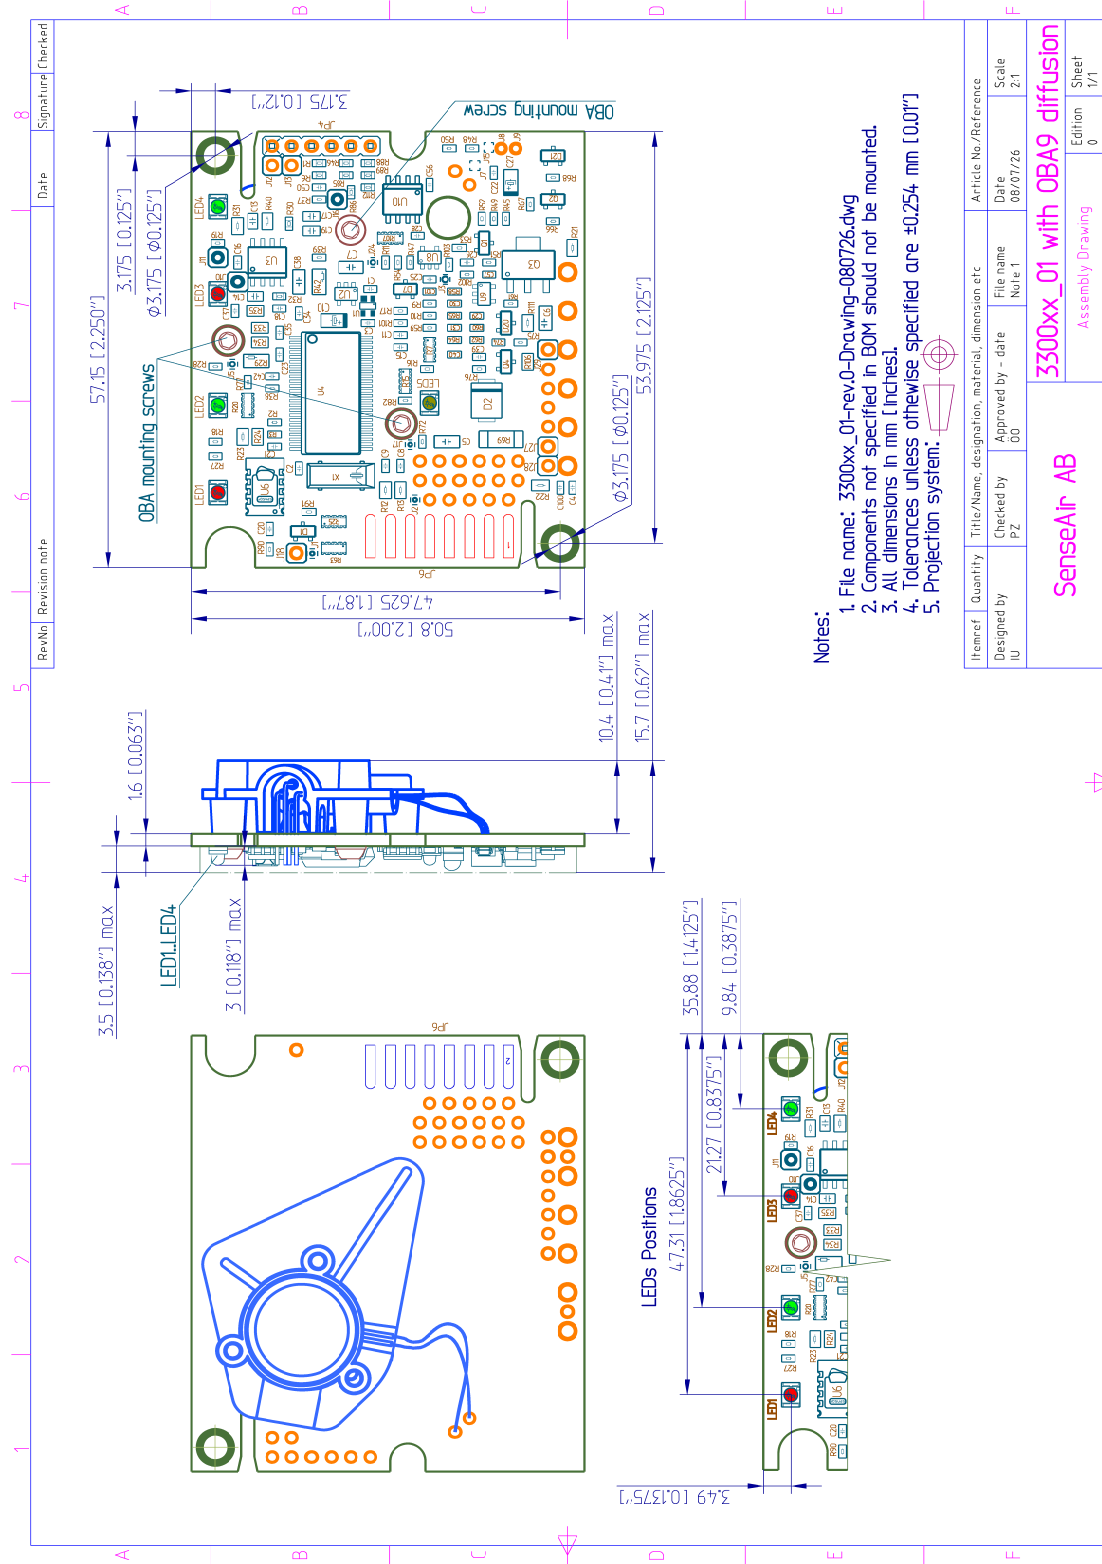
CO2Engine™ ICB mechanical drawing. Diffusion model.
